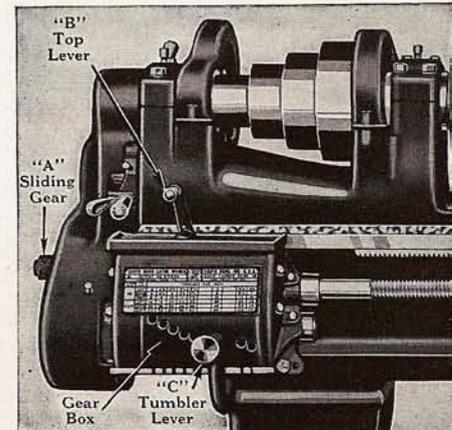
Quick Change Gear Mechanism Used on Quick Change Gear Lathes.
